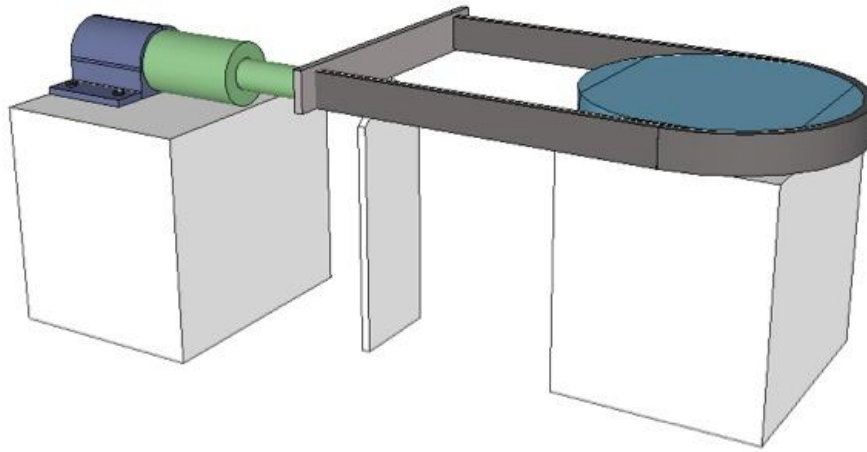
Design 3: Linear Pneumatic with Rotating Bar Attached to Chain
